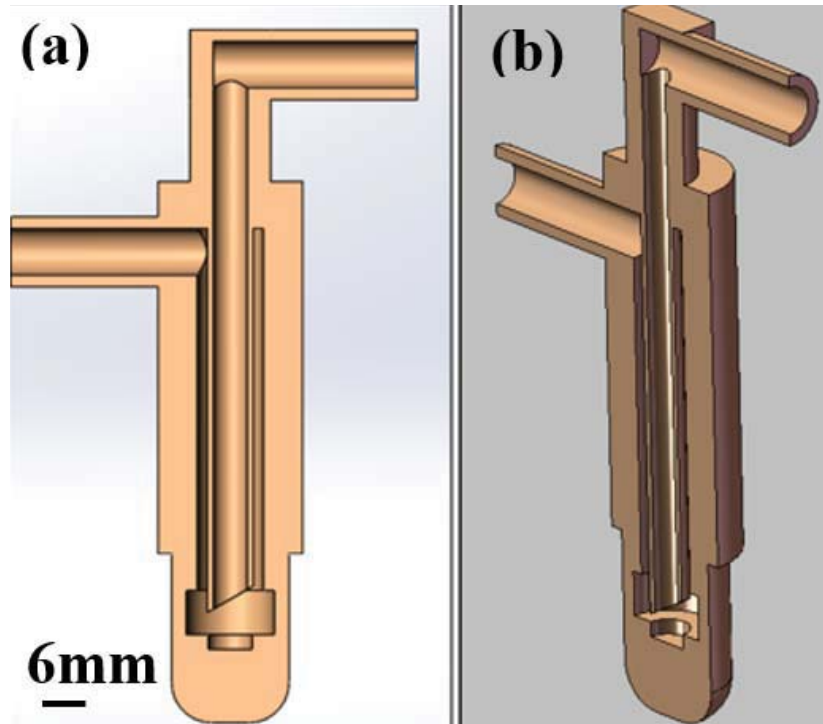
Model Cross-Section, (a) Front View, (b) Isometric View
